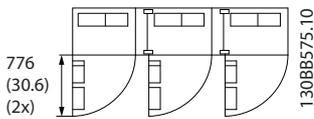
Front Clearance of IP21/IP54 Enclosure Type, Frame Size F11
